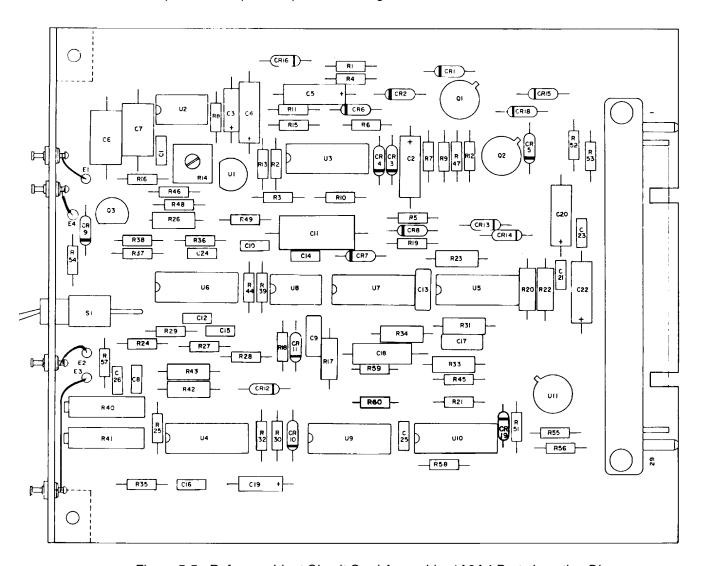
ReferenceIdent Circuit Card Assembly, 1A3A4 Parts Location Diagram
